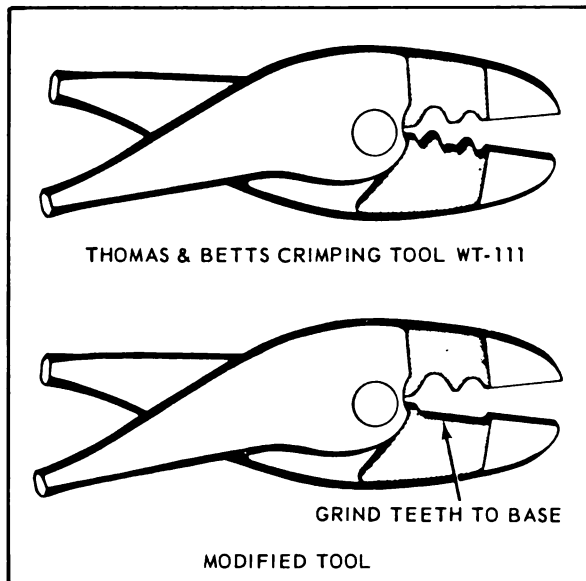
Modified Crimping Tool for Thermocouple Terminals
